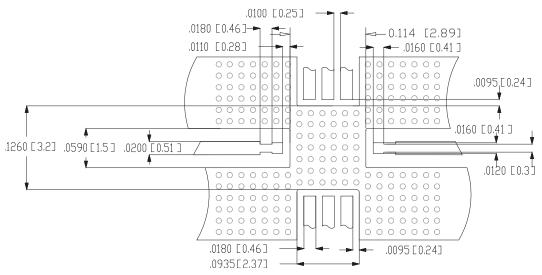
Suggested PCB Land Pattern and Stencil Layout
